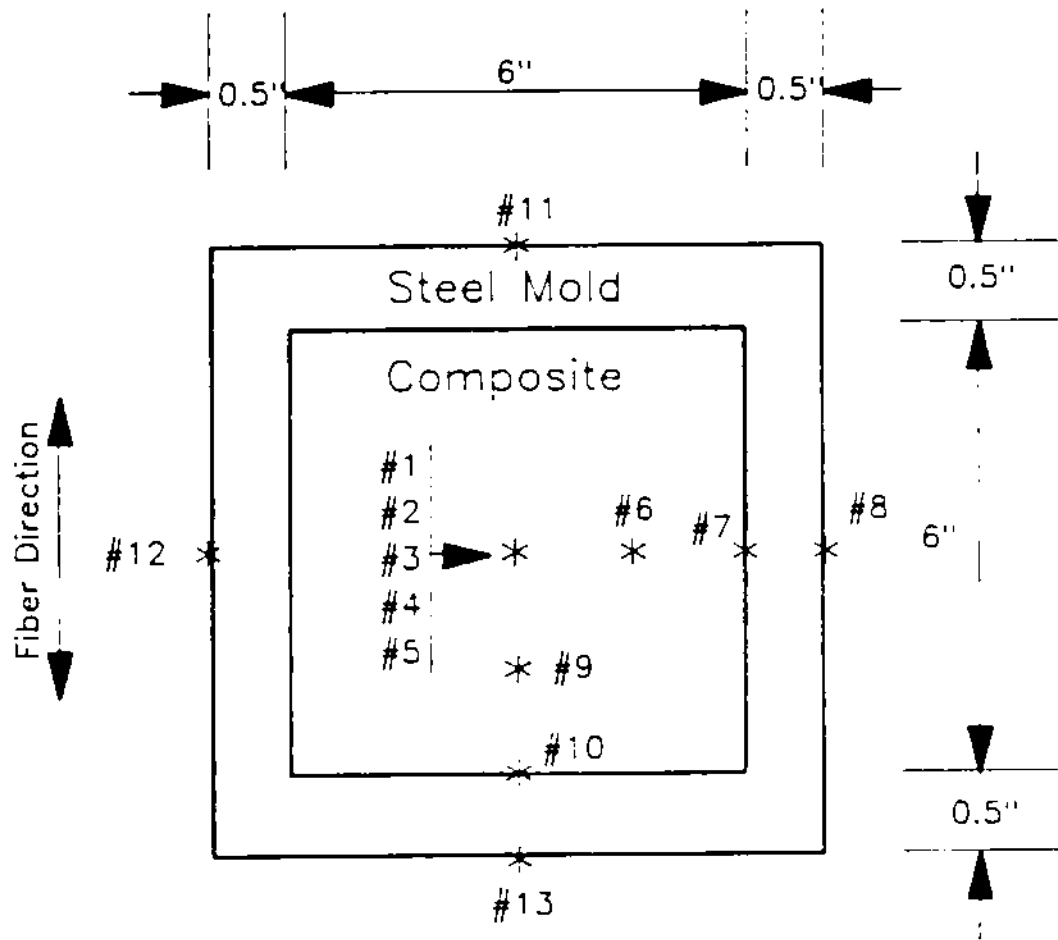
Top-view of the 64-ply T300/P1700 unidirectional composite processing assembly and the locations of the thermocouples.
